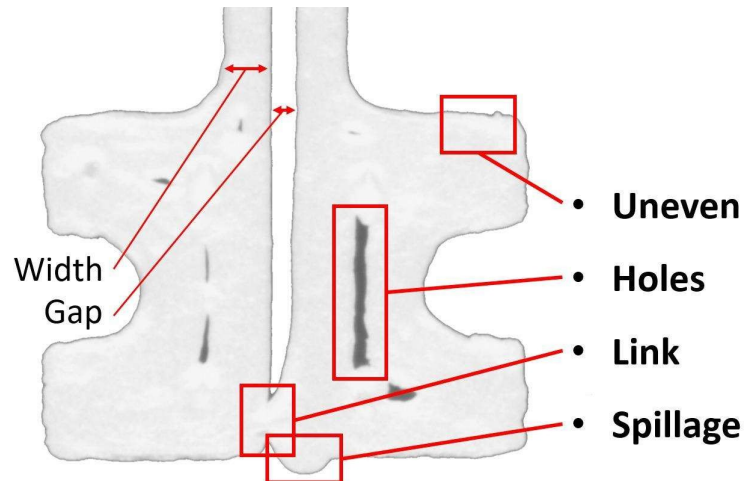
Printed PCB component indicating width, gap and irregularities that occur during printing
